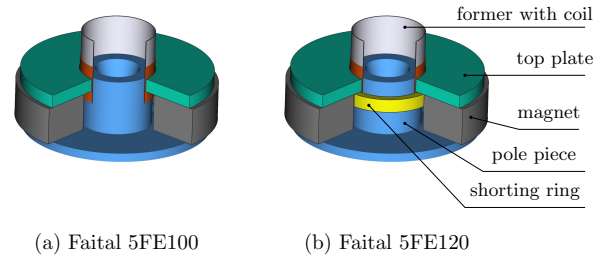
(a) Faital 5FE100 driver motor without shorting ring and (b) Faital 5FE120 driver motor with a shorting ring.
